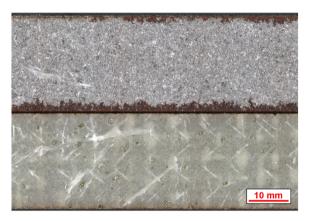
Representative fracture surfaces from specimens tested after 222 days of aging (crack growth direction to the right).
